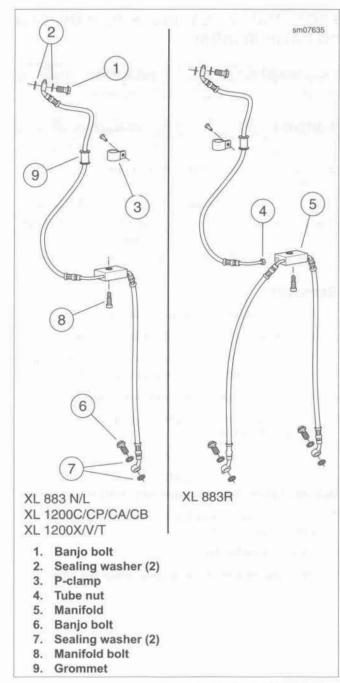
Brake Line Master Cylinder to Manifold to Caliper
